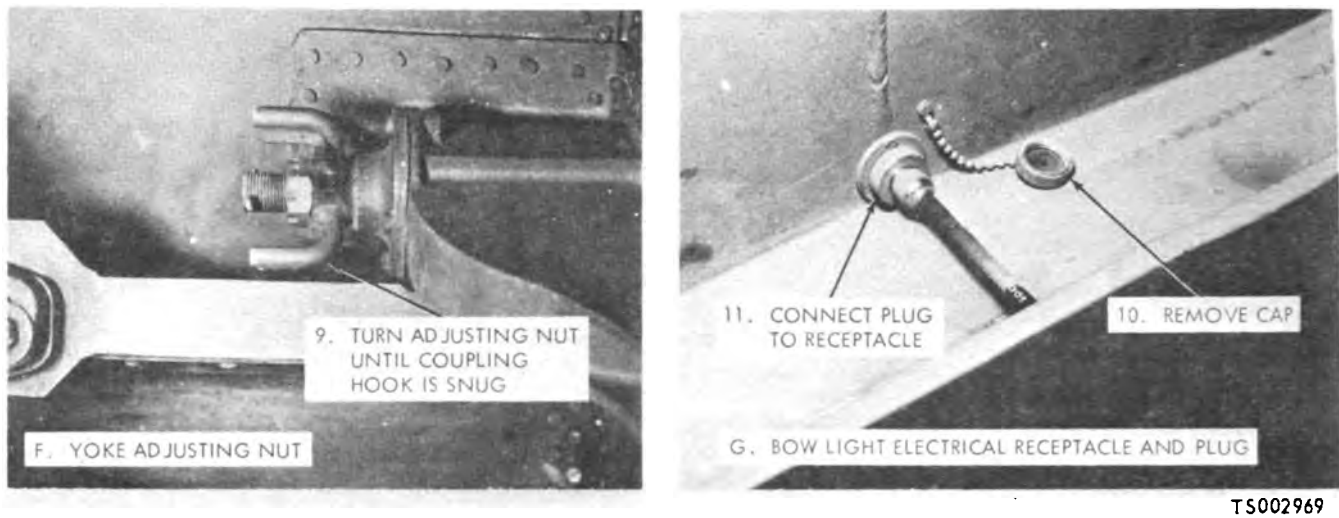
Coupling bow and stern assemblies (sheet 2 of 3).
